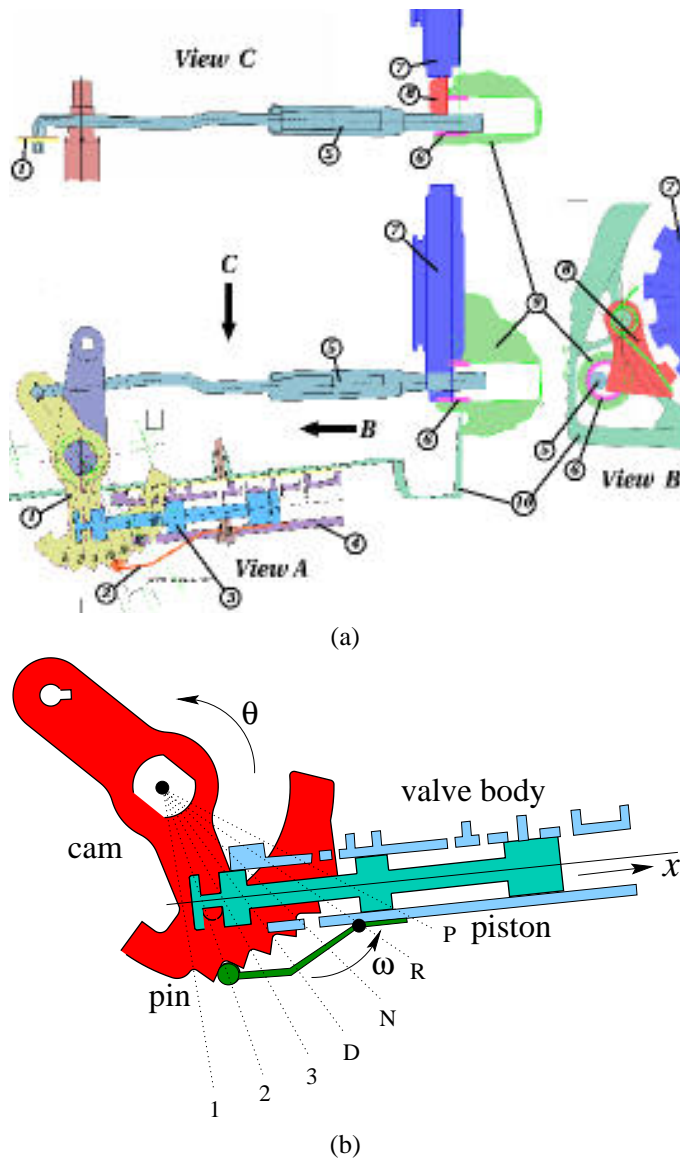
(A) CAD DRAWING OF GEAR SELECTOR MECHANISM; (B) CAM/PIN/PISTON ASSEMBLY.
